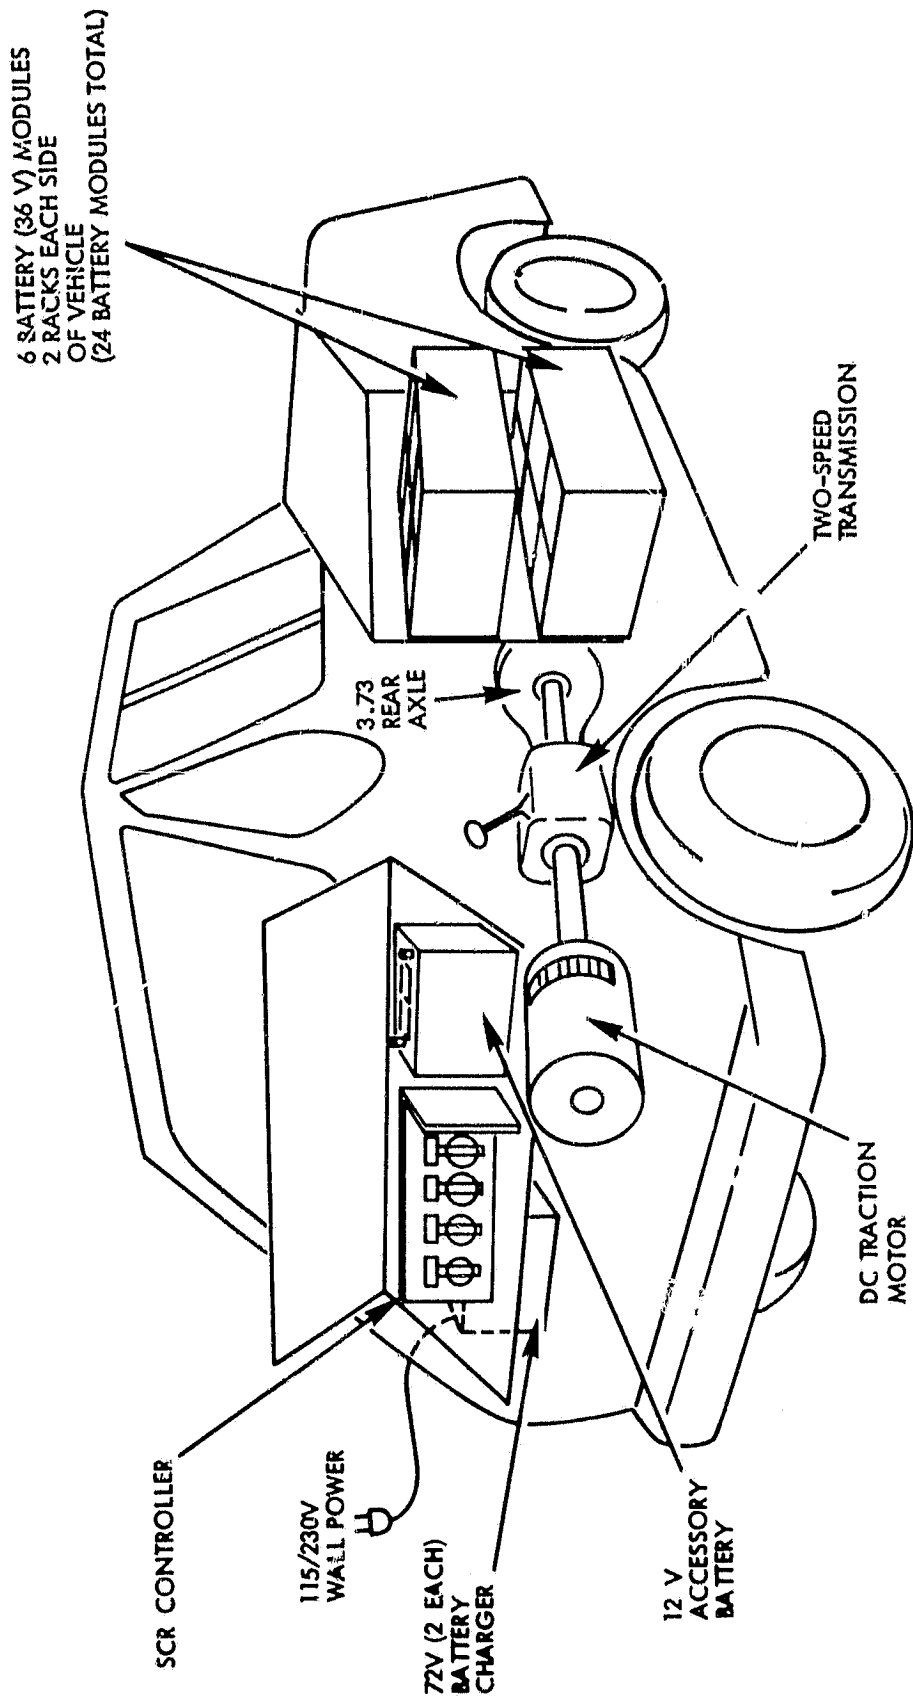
Cross-Sectional View of Battronic Truck Showing Major Component Placement
